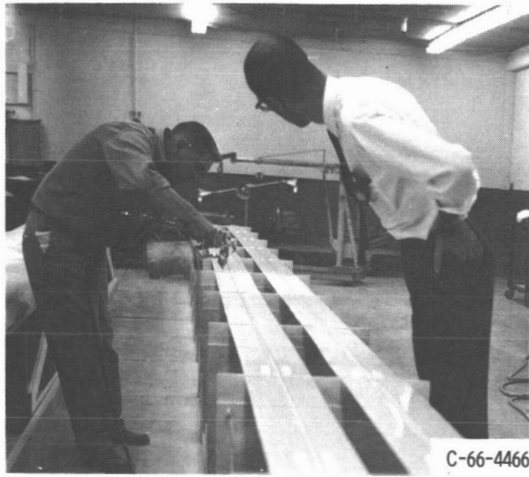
Application of Z-93 coating to two 40-foot finned-tube assemblies.
